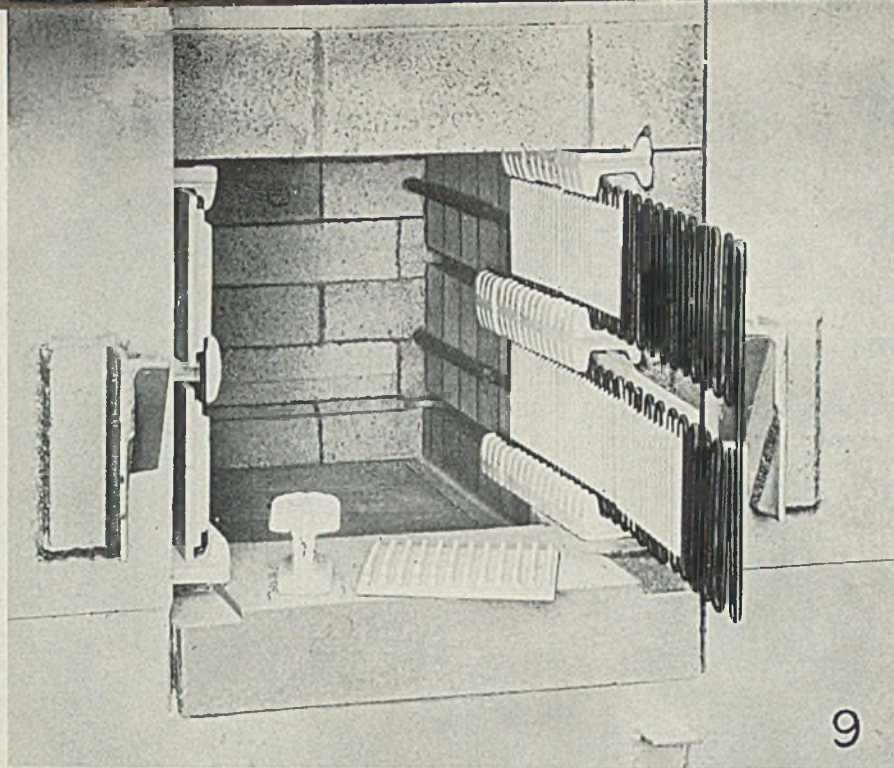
Closeup of furnace chamber showing how electric resistor heating elements are mounted on furnace walls using radiant plates and fluted T-head supports
